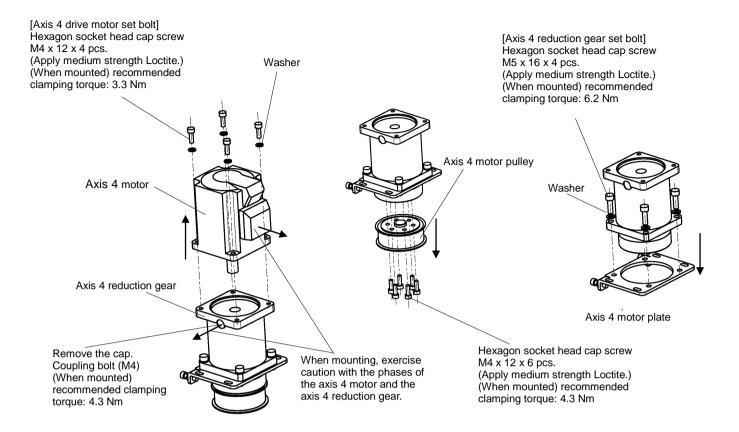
Replacing axis 4 reduction gear (KHL-500, KHL-600, KHL-700)
